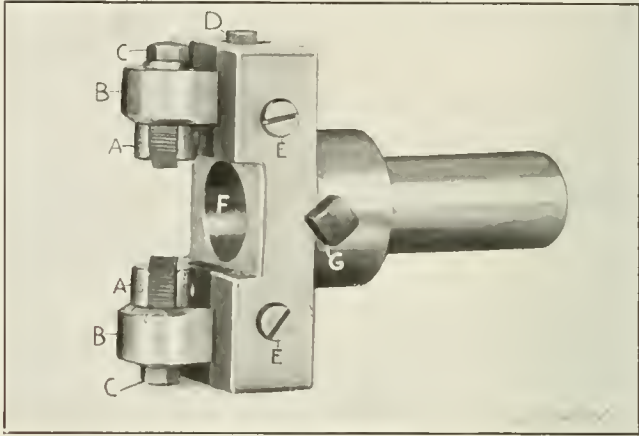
Brown & Sharpe Adjustable Turret Knurl-holder
